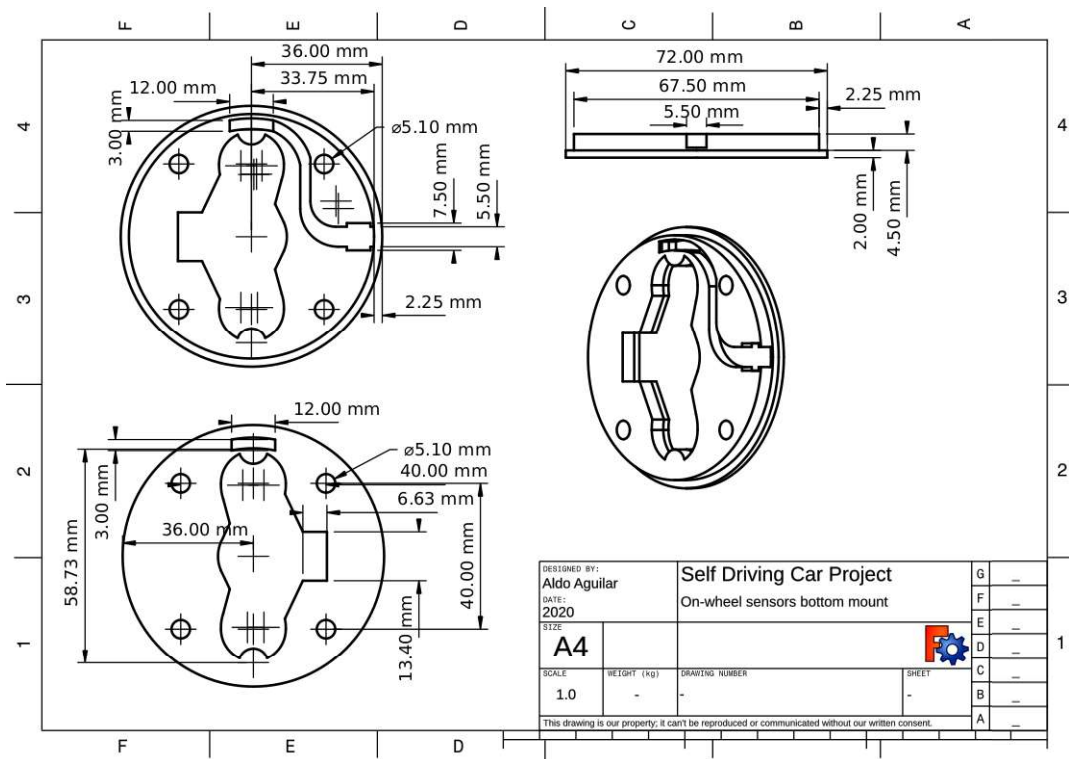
On-wheel IR sensor mount bottom part CAD.
